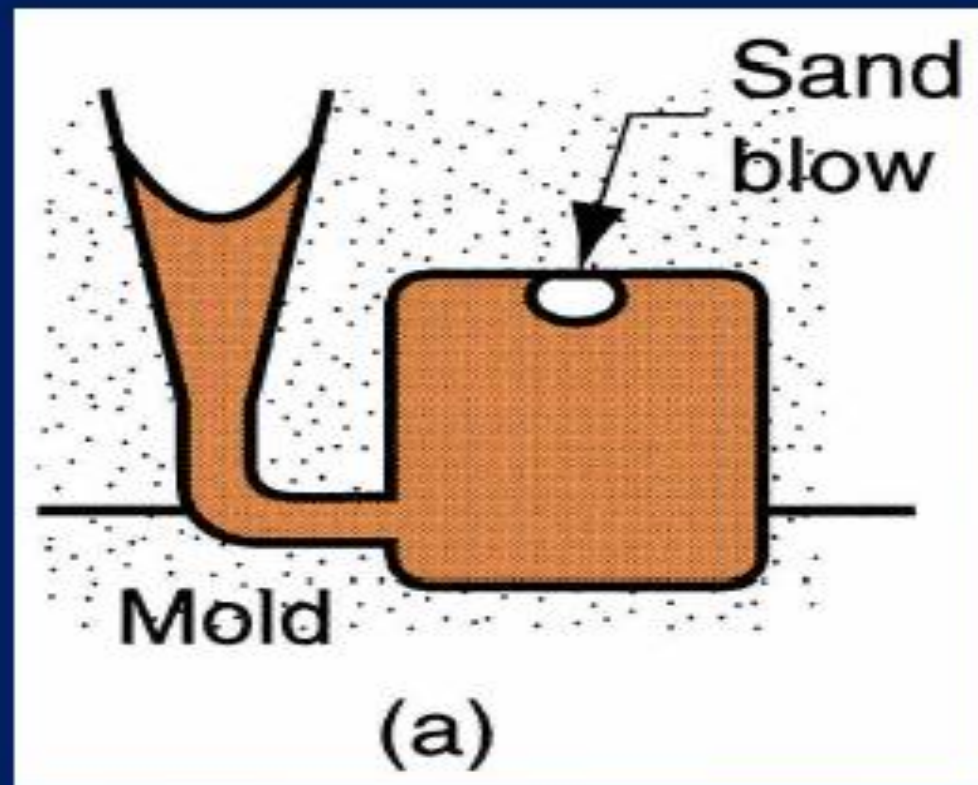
Common defects in sand castings: (a) sand blow
